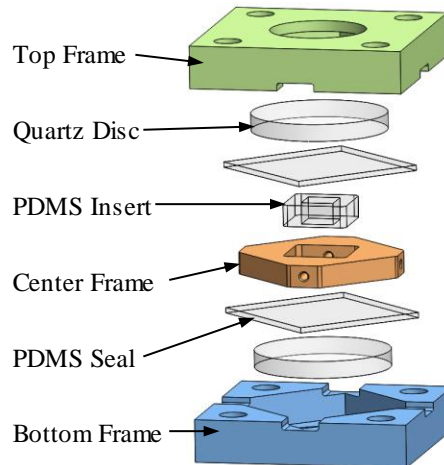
Epoxy curing clamp assembly. Modified from [160].
